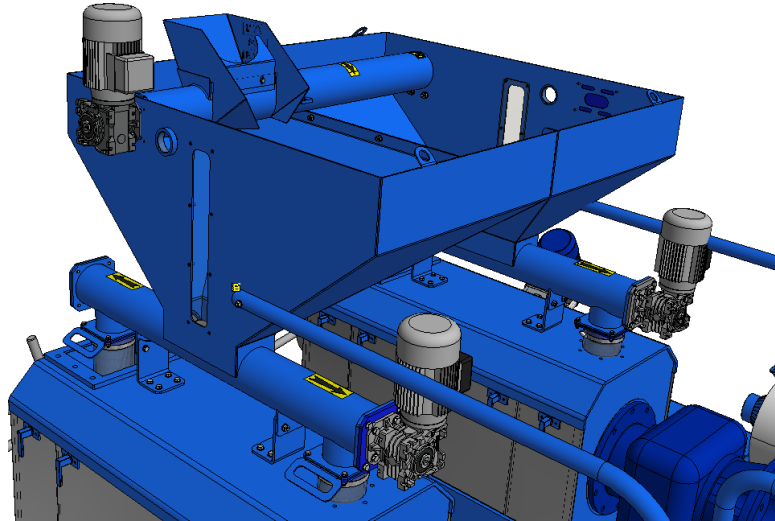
Sliding conveyor 2.14.1 and dosing conveyor with a hopper 2.15.1.1 and 2.15.1.2
